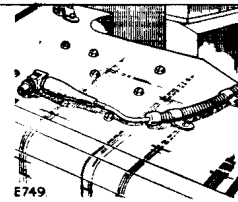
Aerial co-axials removed from dummy socket and located on front wing
